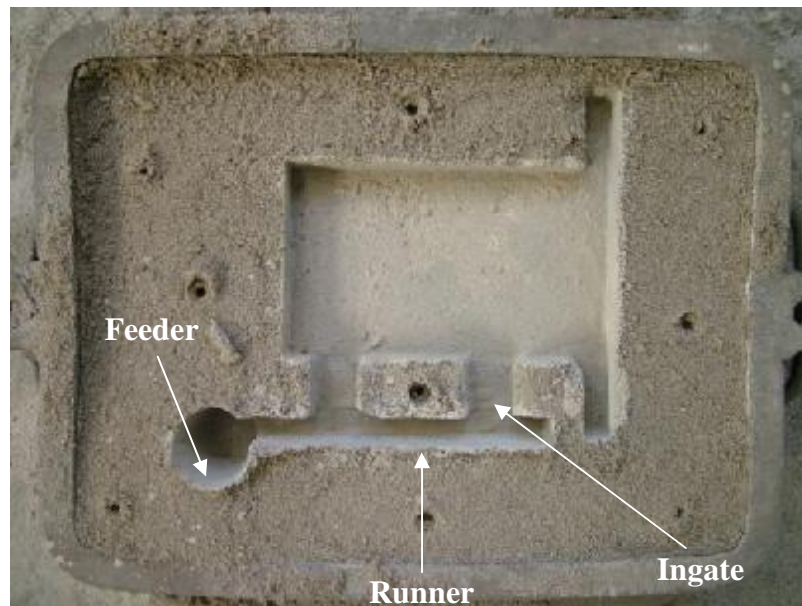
7. Photograph of the modified mould used for sand casting anodes (third design)
